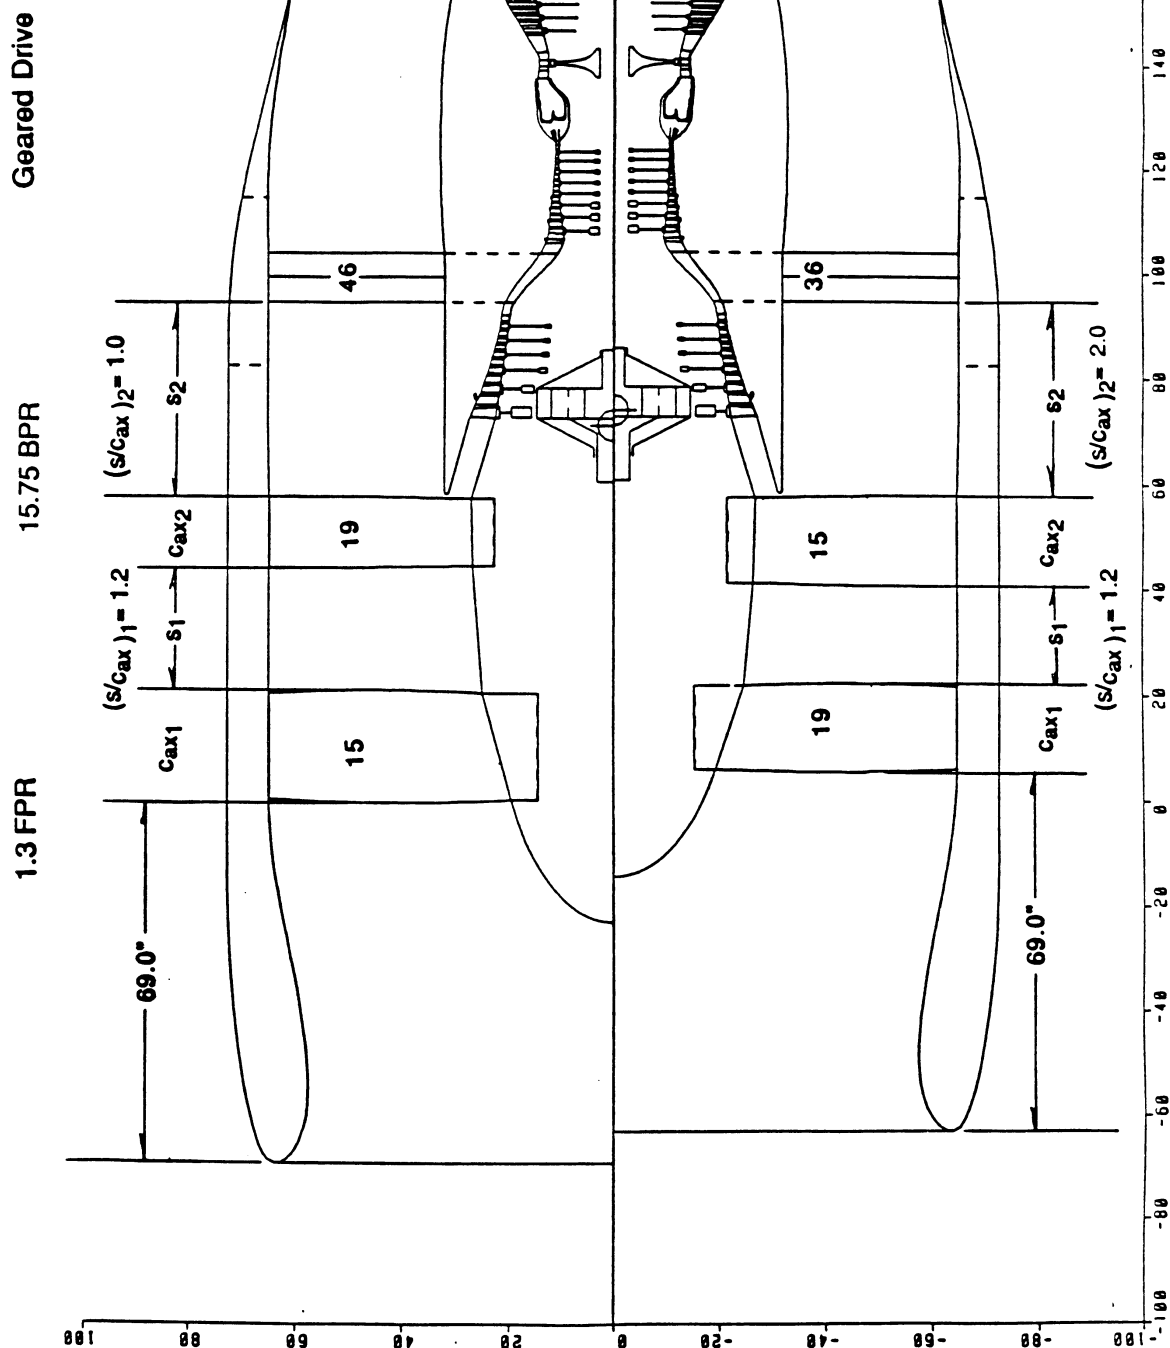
Geared Counter-rotating Fan Engines 5C and 5B Cross-sections
